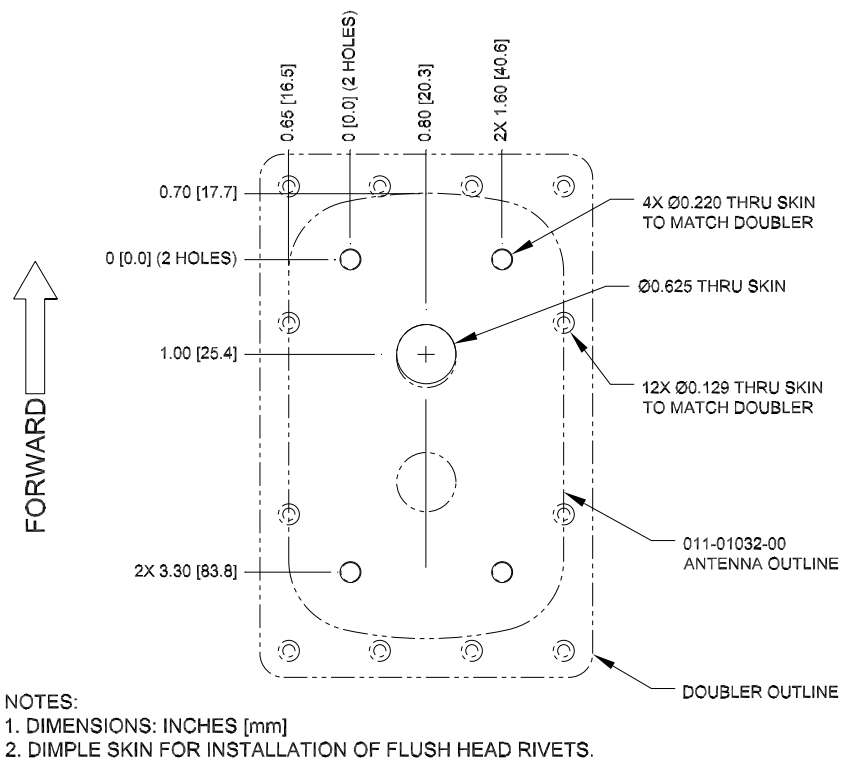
Skin Cutout Detail, ARINC 743 Footprint Antenna, Skin Thickness 0.032" to 0.049"
